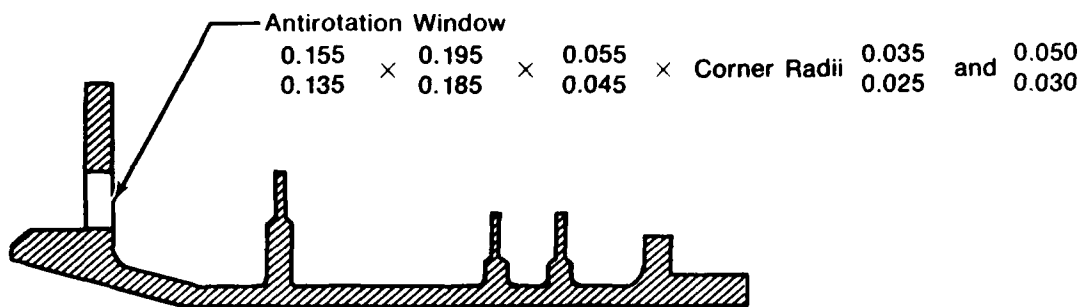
6-7 Compressor Spacer (P/N 4039846)
